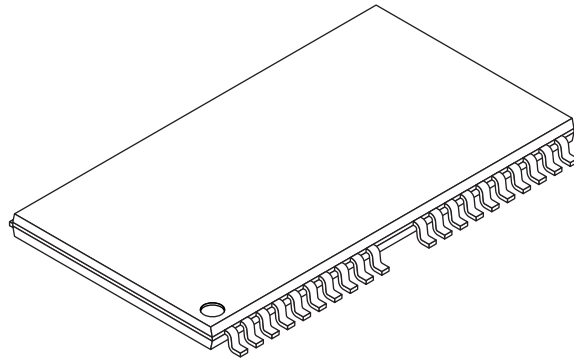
40/44-Pin TSOP (Type II) Package Dimensions
